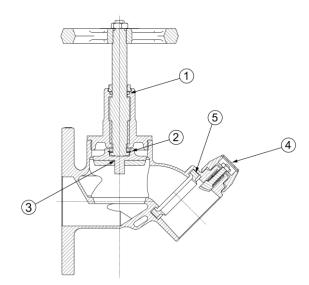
Spares detail - Bibnose valve 3220 Series with flanged inlet and 2.5 inch female instantaneous BS336 outlet
